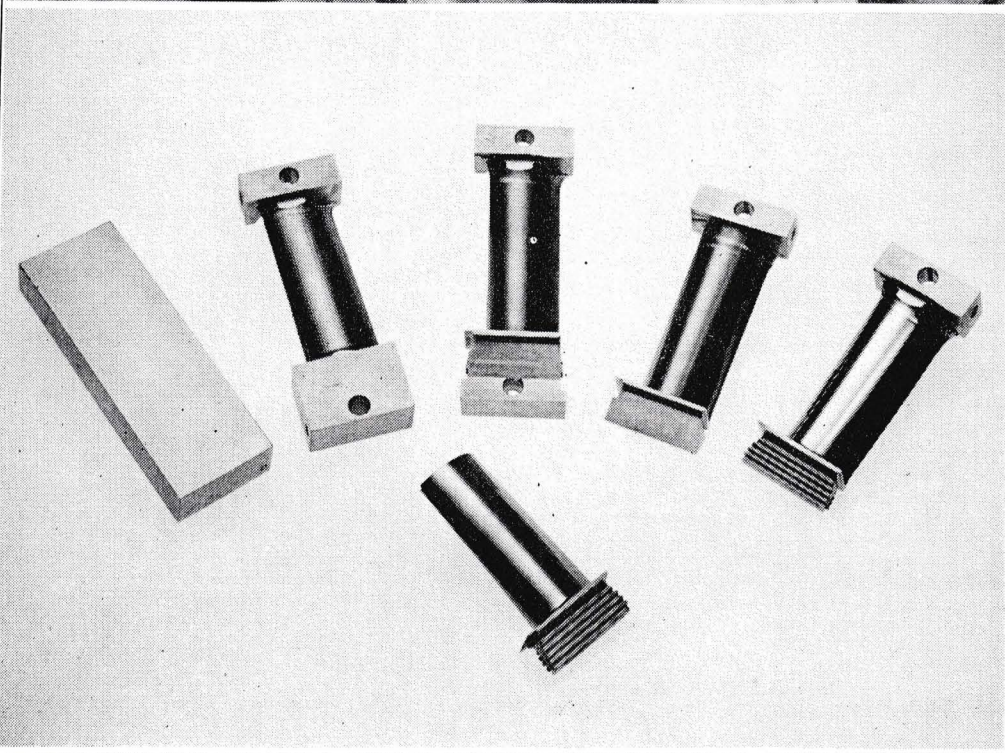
Special attachment in Modern milling machine for profiling blades.
